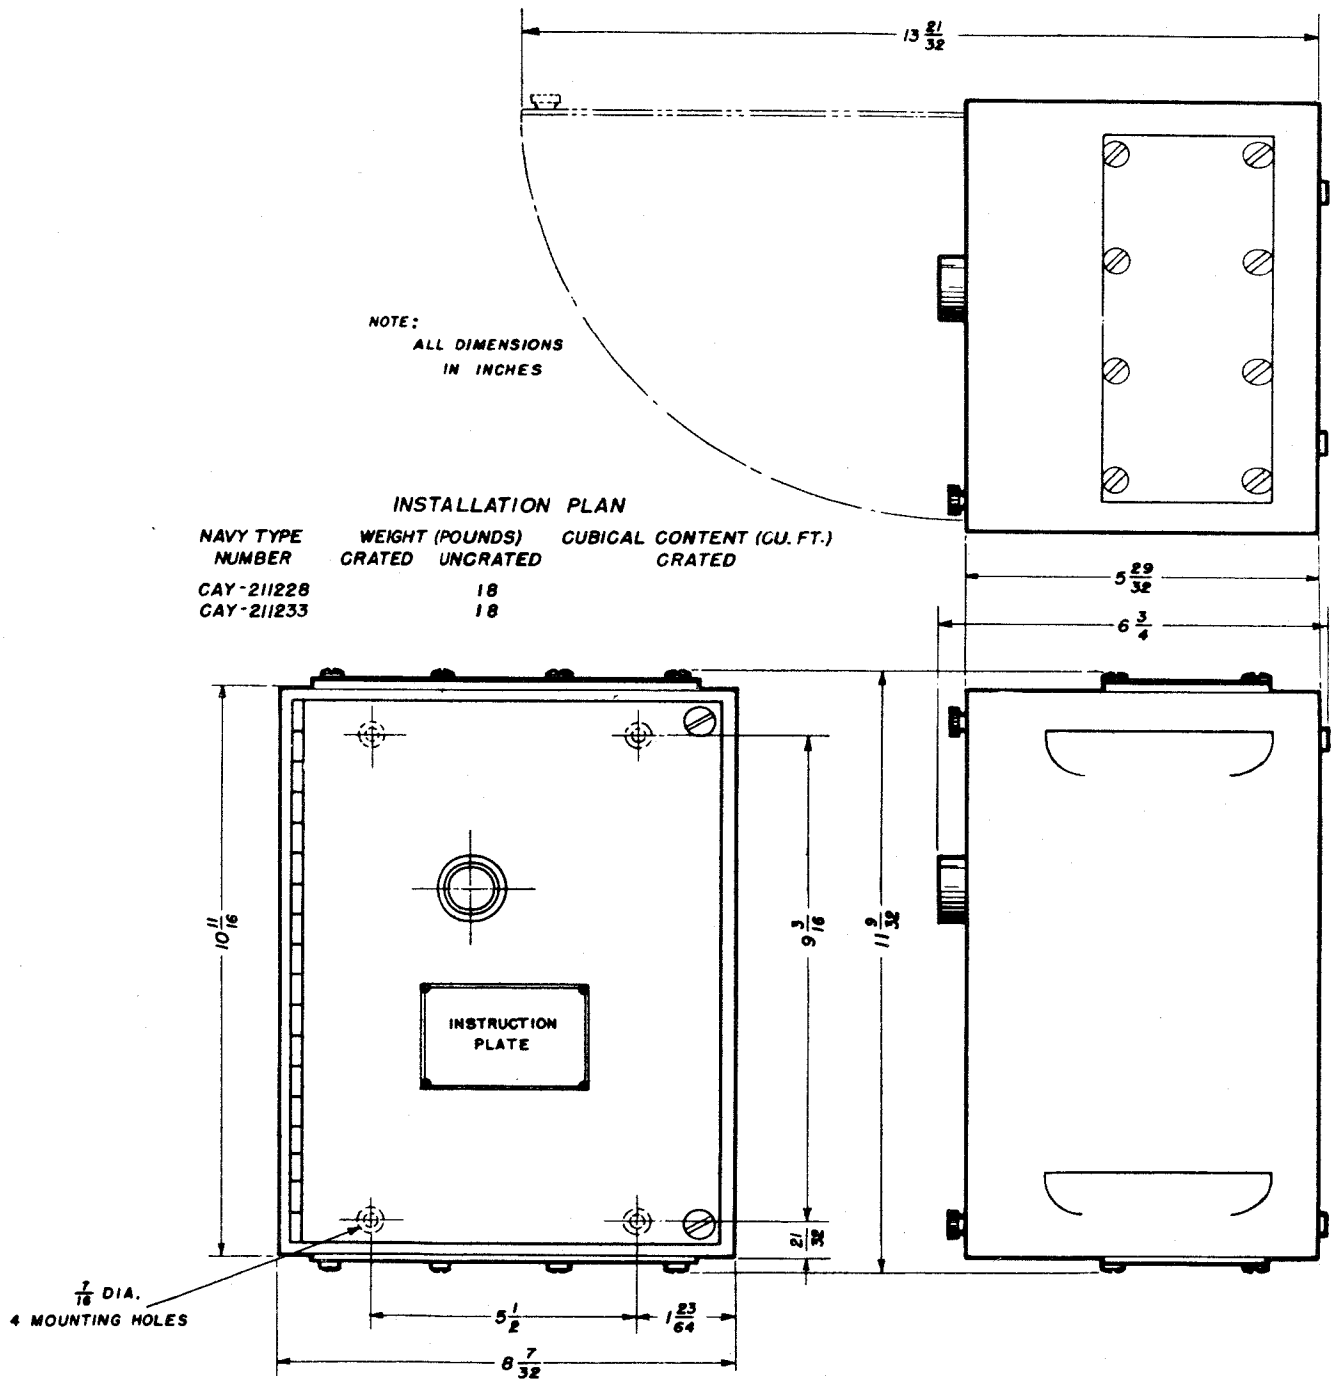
Magnetic Controller, TBL-13, Type CAY-211228, 440/3/60 A.C. Operation. Outline Drawing (Dwg. 7713237)
